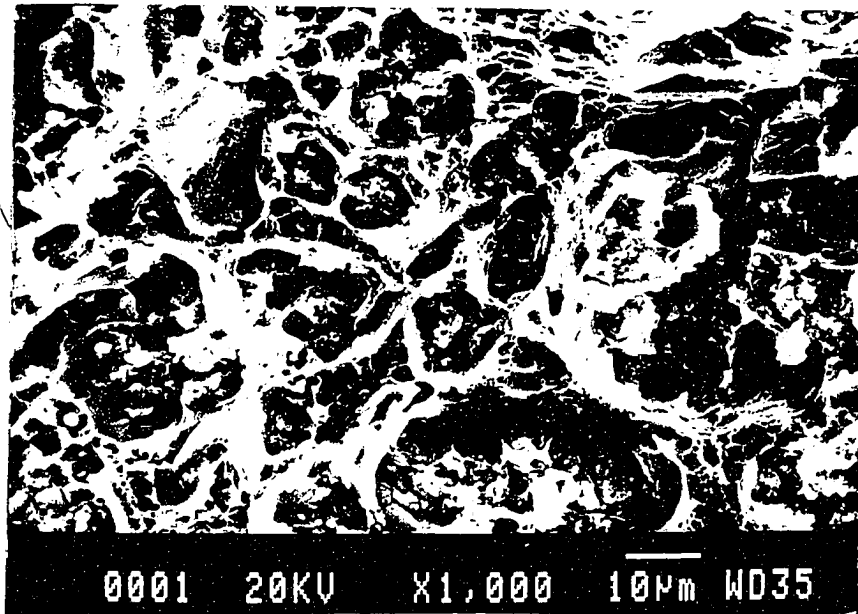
Appearance of a fracture surface produced in a P/M 2014 alloy standard sintered for 0.5h.
